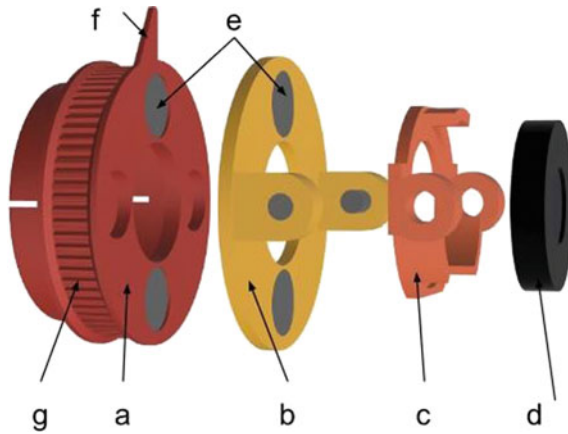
a The gear part with magnets; b The holder with magnets to link with (a); c The optic holder part, designed to tilt the optic from -20 to 20° ; d The optic; e Magnets; f The home point to mark the angle of optic; g Gear teeth
